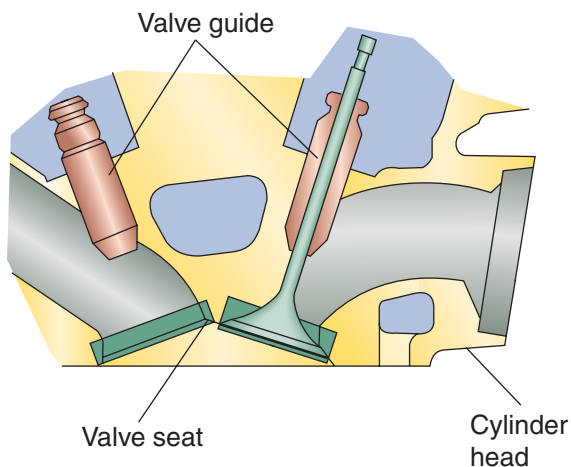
Valve seats and guides are located in the cylinder head on the OHV engine. On the L-head-type, seats and guides are located in the block but they perform the same function.
